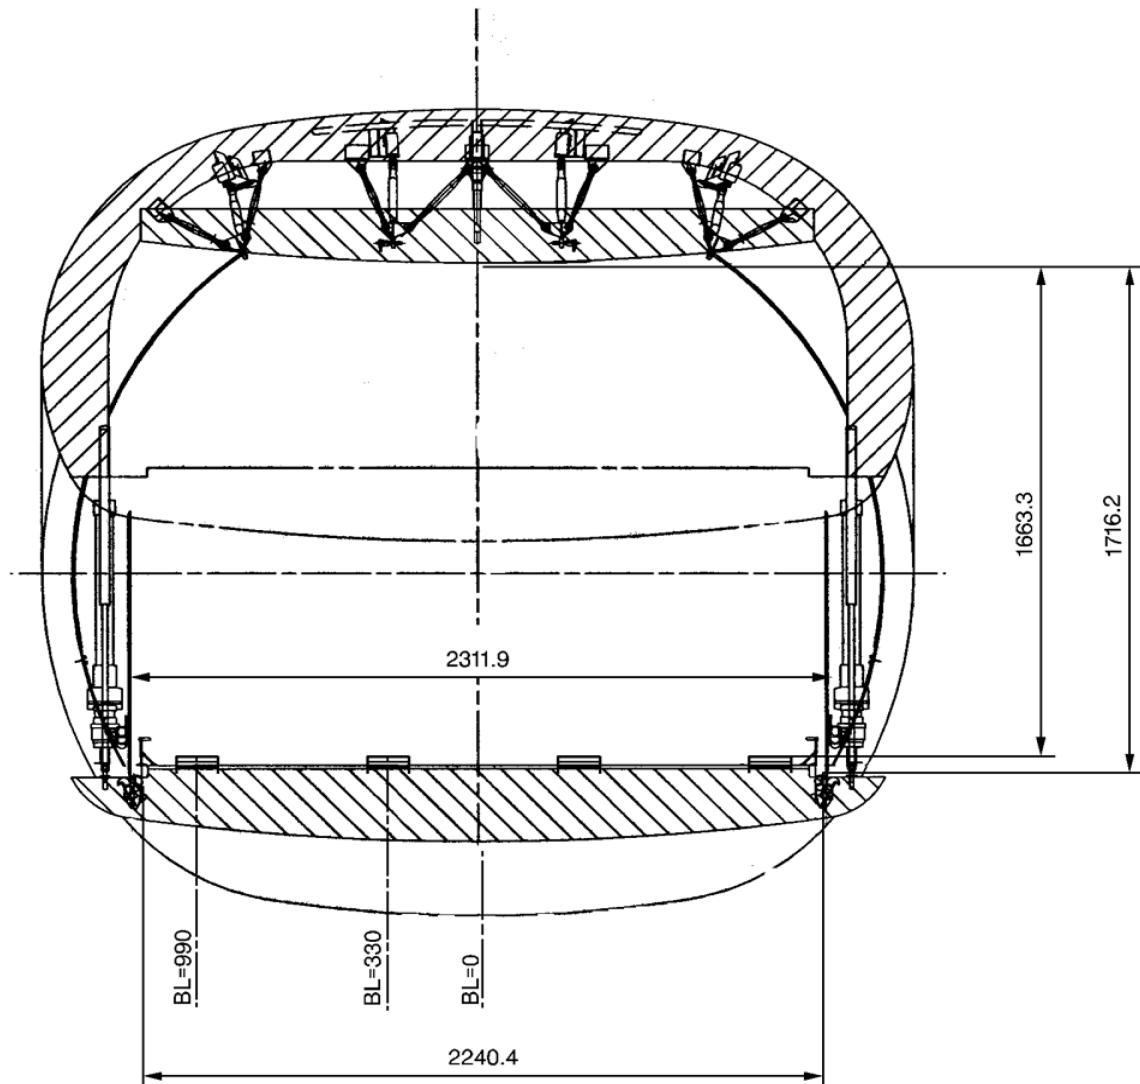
Cargo cabin dimensions (Sheet 4 of 5)
